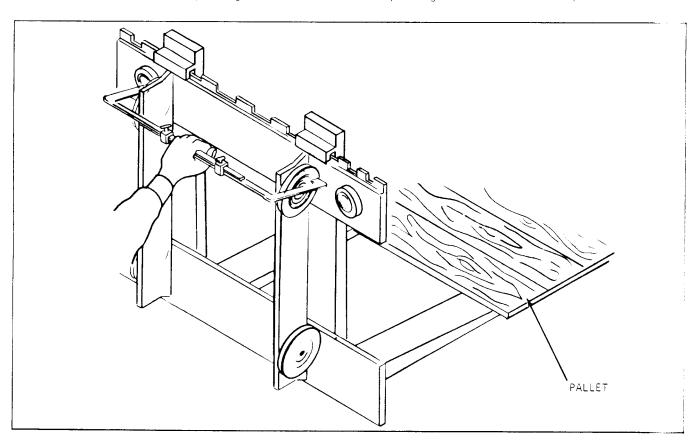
Spanning Upper Rollers (Four Roller Carriage)
